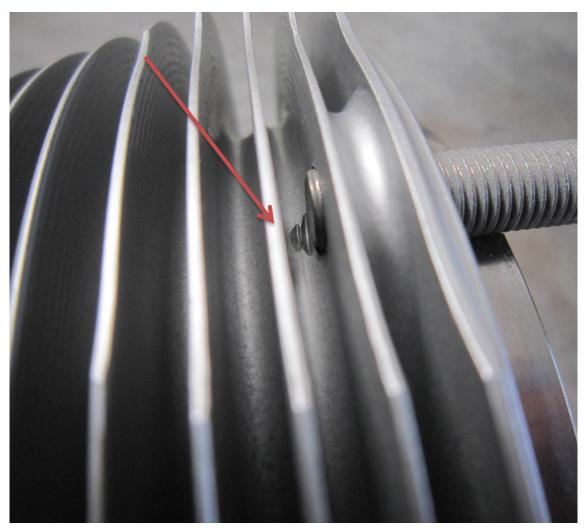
Bolt against end of usable thread, any further tightening will damage bolt thread.
